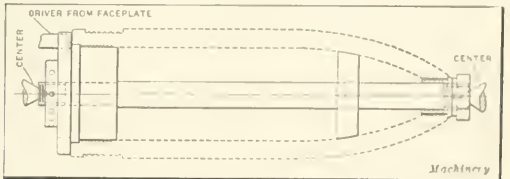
Diagram showing Details of Construction of Fixture used for holding Shell when performing Operation shown in Fig. 107
